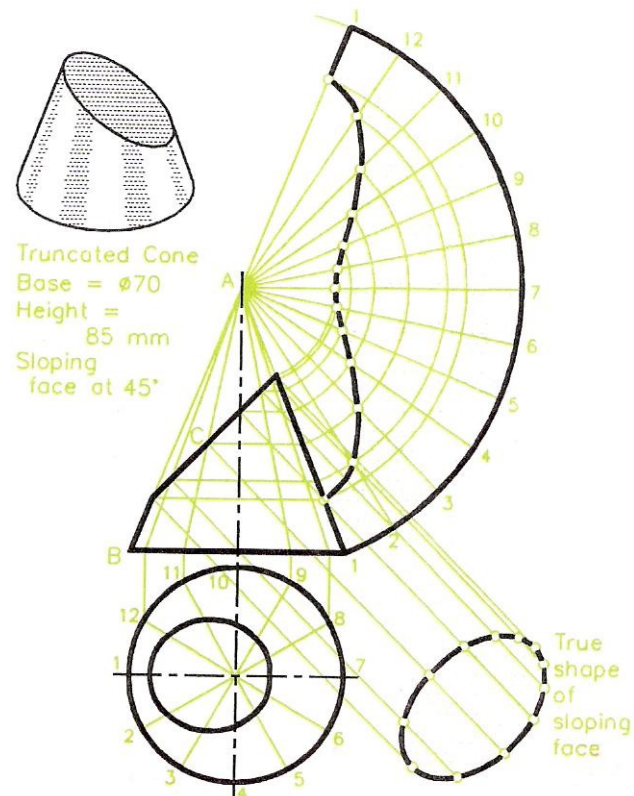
Seam Normally Placed on Shortest Side (Welding Purposes)
